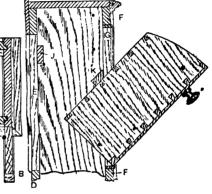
Dodged Section through Upper Part of Music Cabinet showing Drawer Extended.
